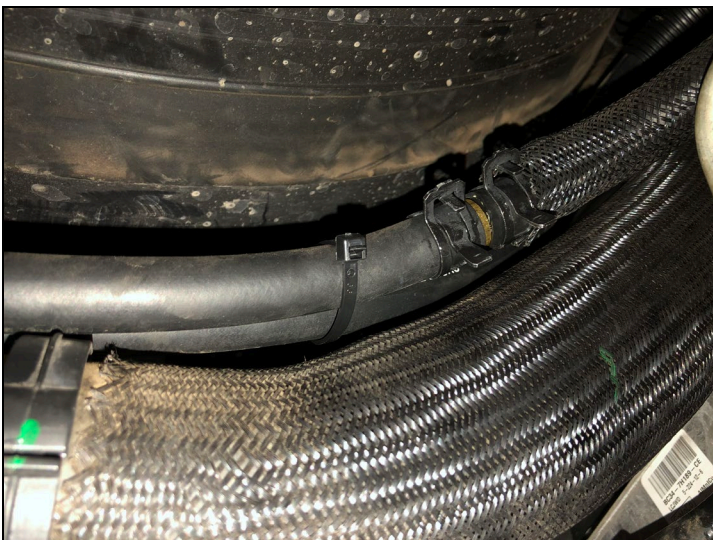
Cooler Hoses Cable Tied Above Radiator Hose
